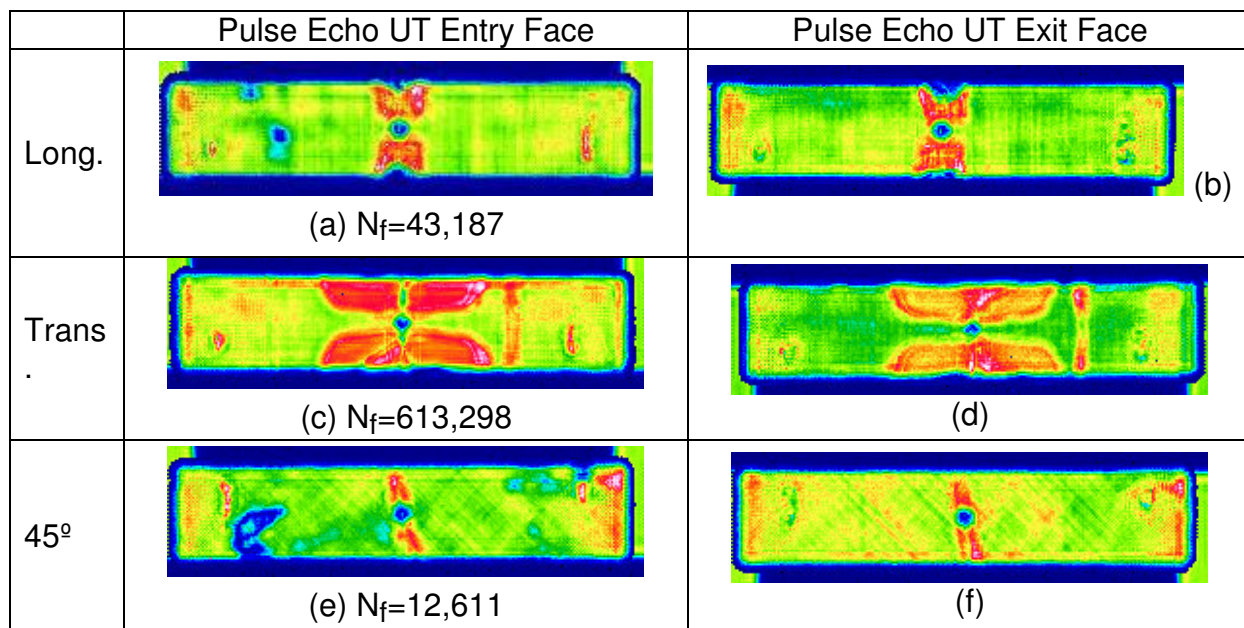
FML 4 cold expanded hole tested at a net stress of 198 MPa with cycles to failure (N_f) provided. Longitudinal (specimen 33-B-3-L), transverse (specimen 30-B-2-T) and 45° degree coupon (specimen 33-B-6-F)
